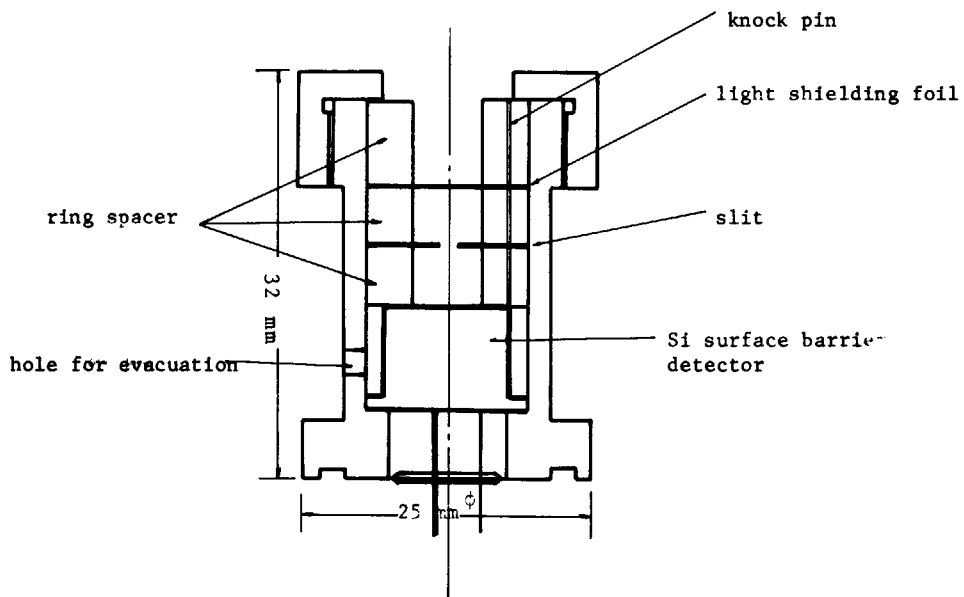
Detector assembly. This assembly is mounted on the movable holder.
